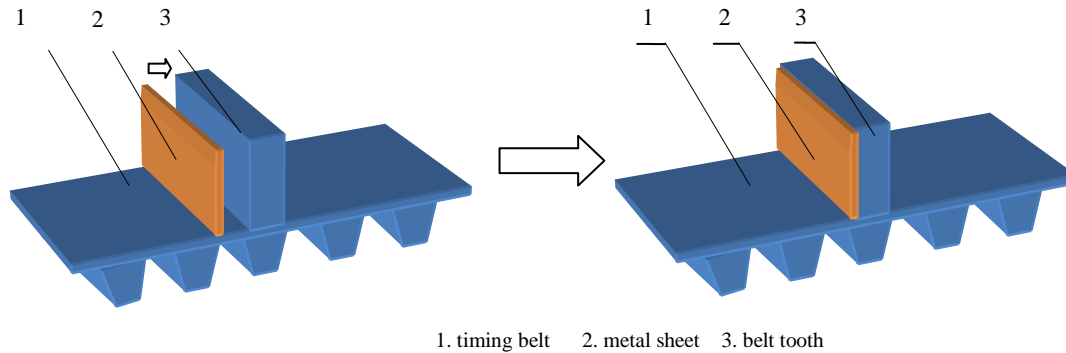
Schematic diagram of attaching belt tooth working face with metal sheet
